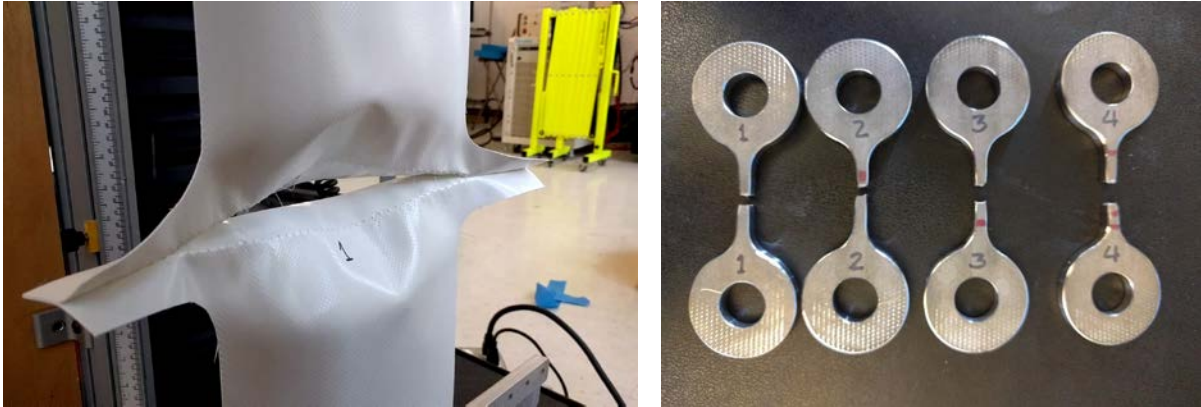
Tests to failure of sewn fabric seams for the zippered panel design (left) and machined metal fuses for the rope stop design (right)
